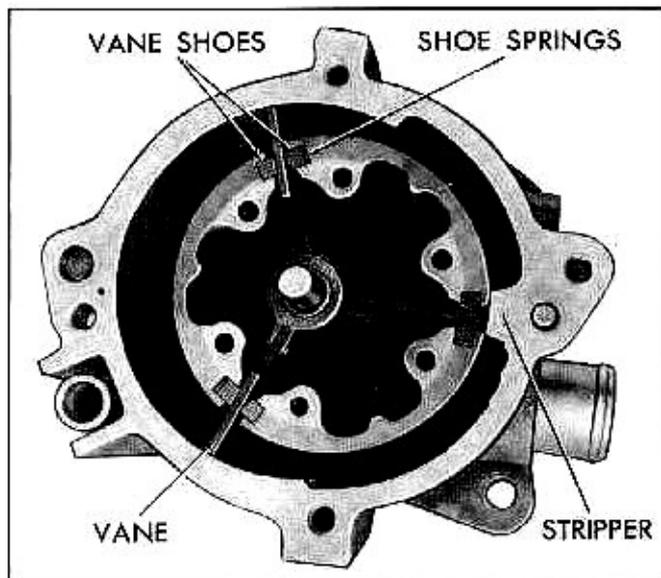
Vanes, Vane Shoes and Shoe Springs Installed
